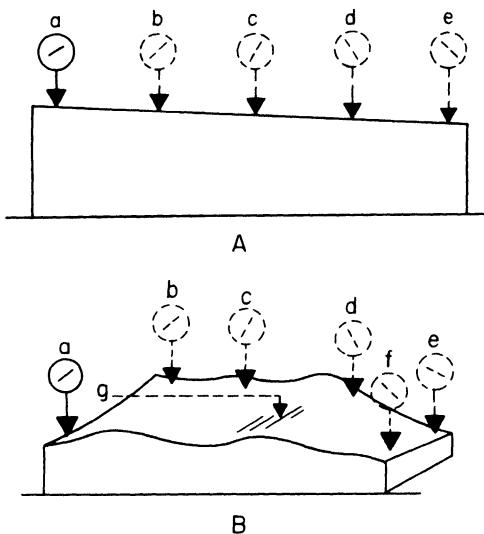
Methods of exploring the contour of a work-piece. (A) Tapered work-piece. (B) Work-piece of irregular shape.
